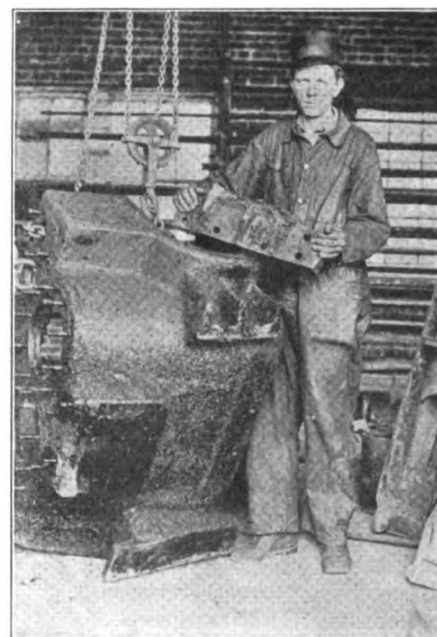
LOCATION AND CHARACTER OF FRACTURE
